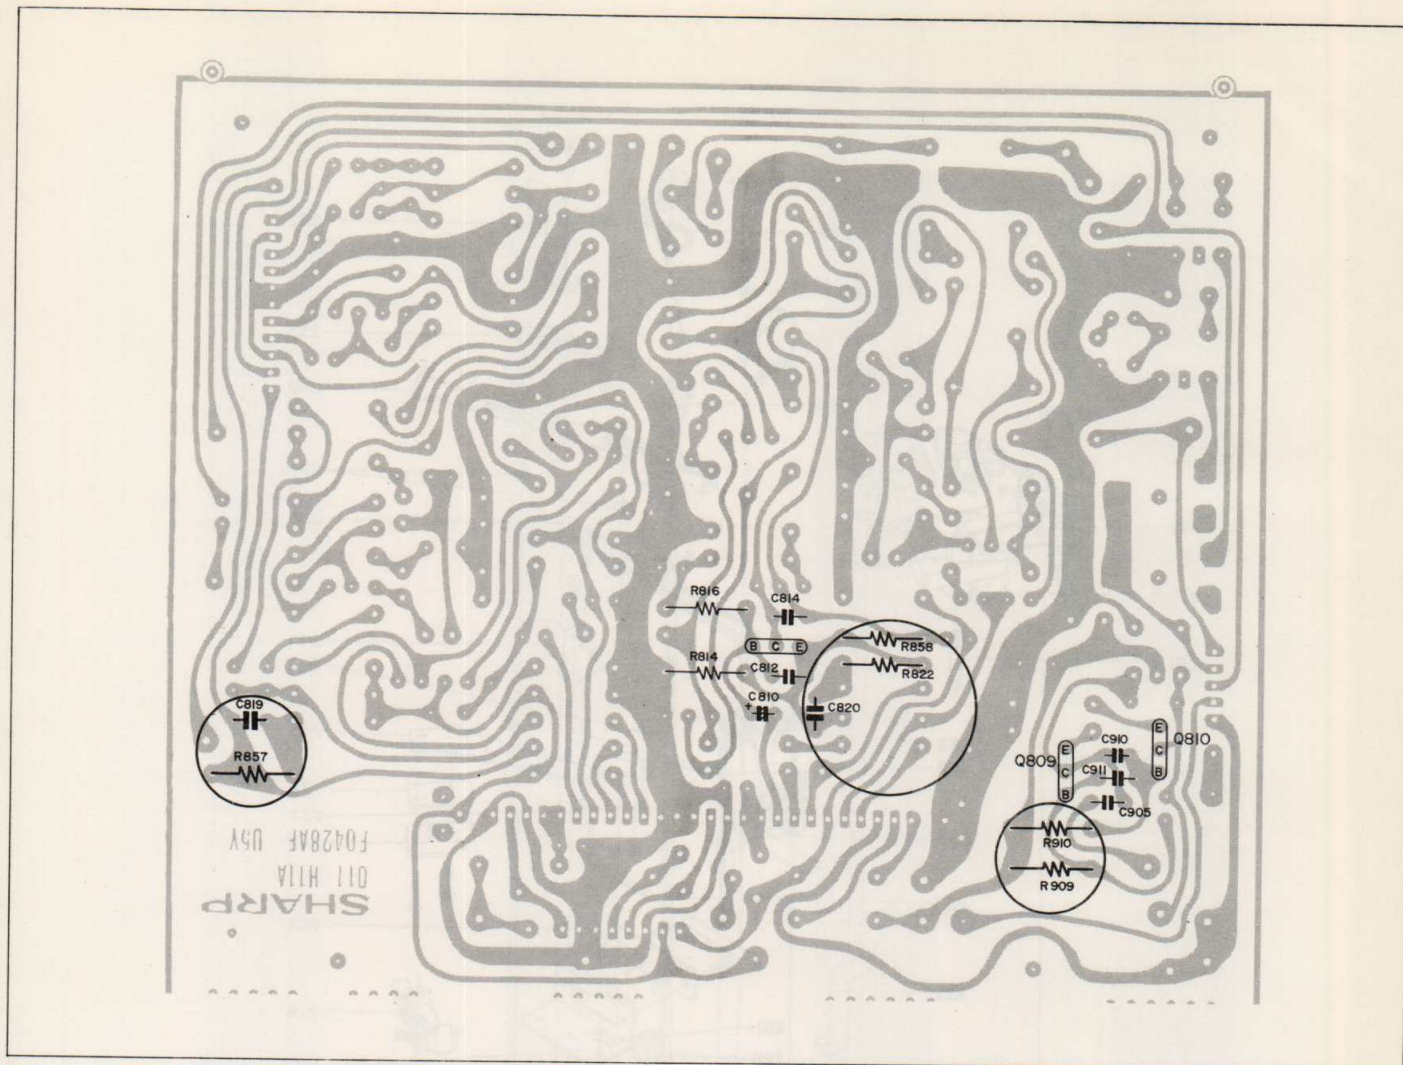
PARTS LAYOUT ON NEW TAPE DECK AMP. BOARD
